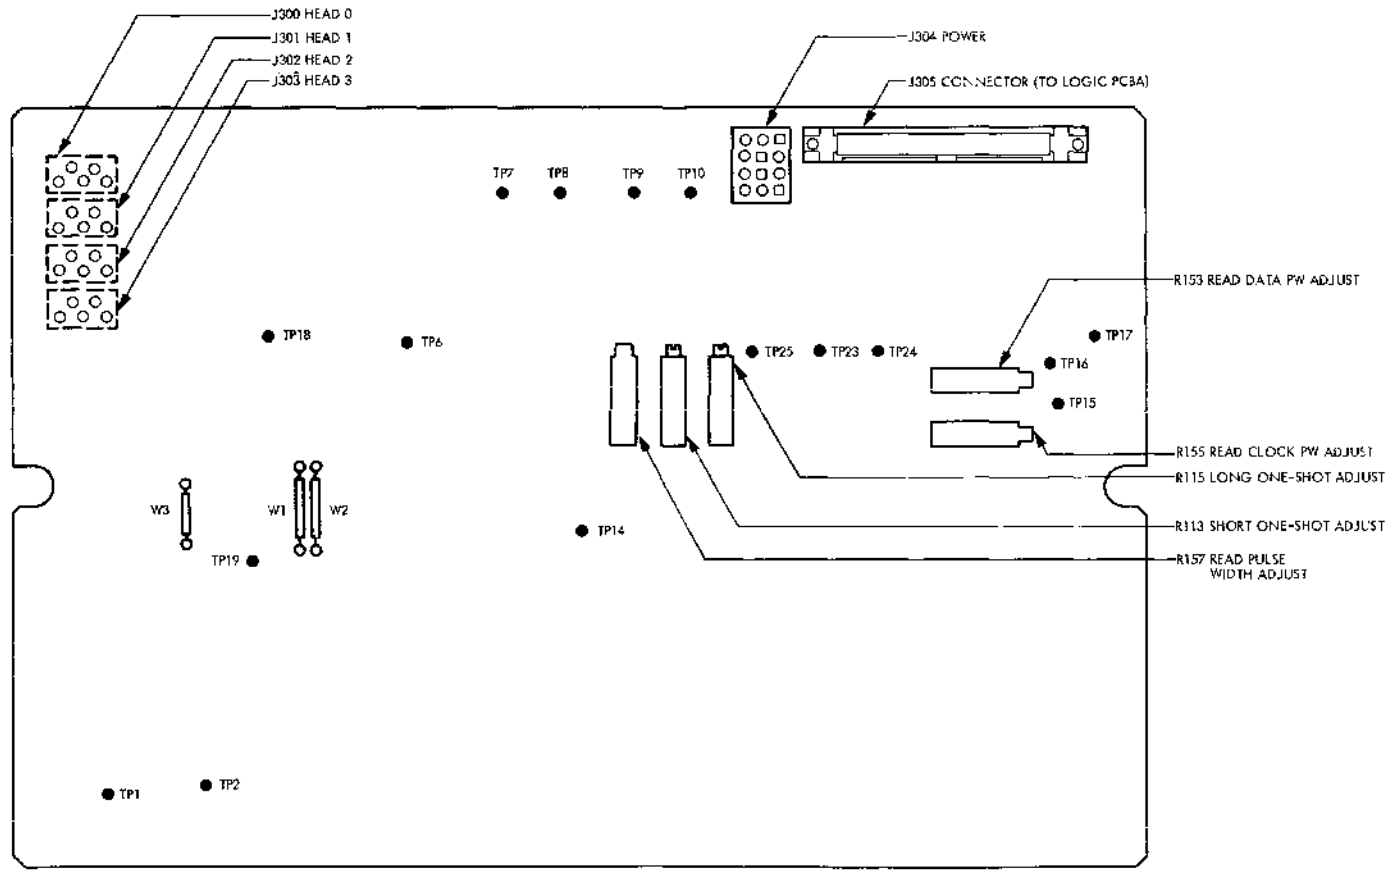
Read/Write PCBA, Test Point and Connector Placement
